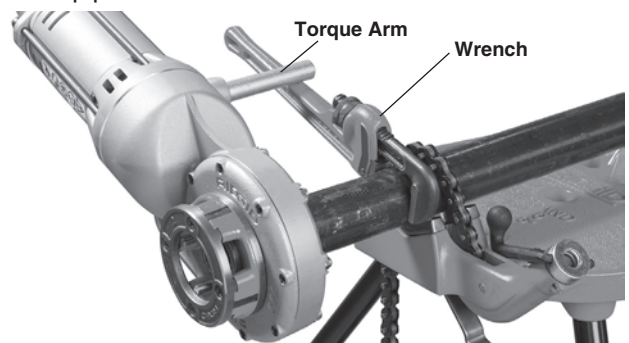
Threading Using Pipe Wrench as a Support Arm
